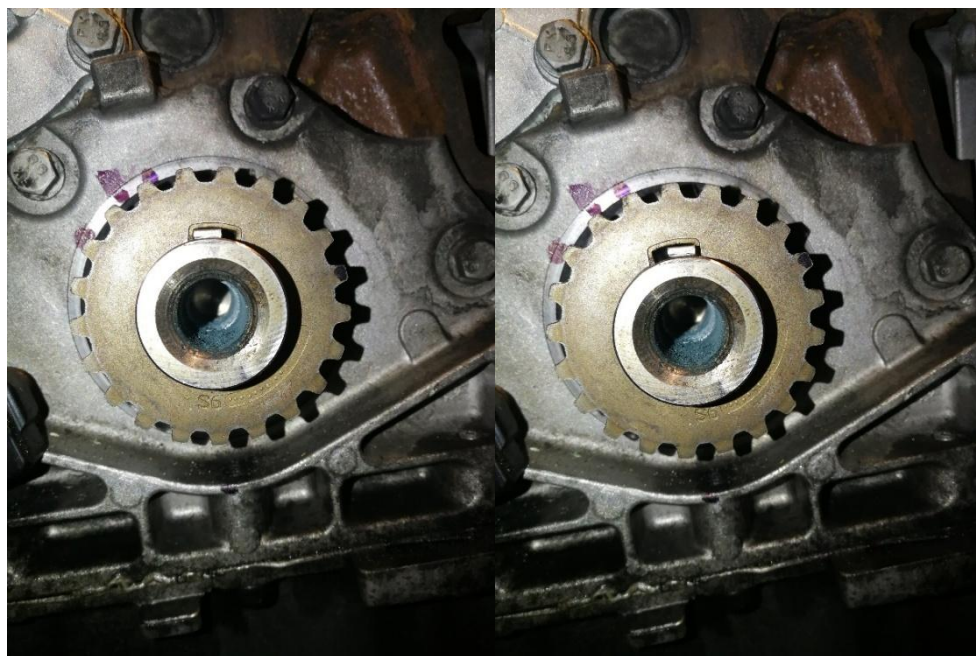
Extreme positions of the sprocket on the crankshaft.
